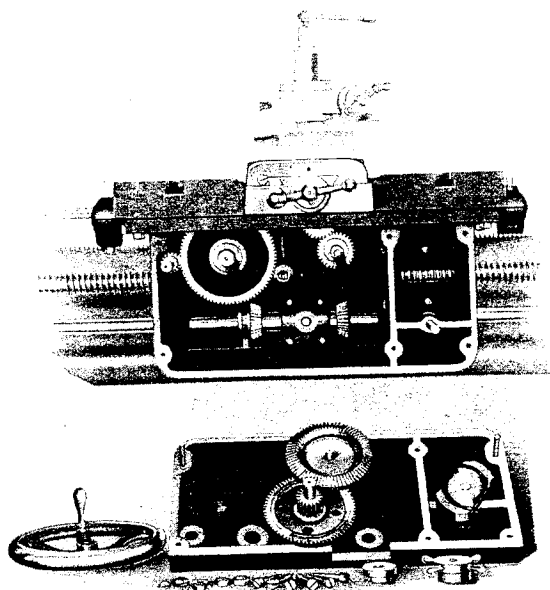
Apron with removable front plate, used on 25, 27, 30 and 36-inch Engine Lathes.
